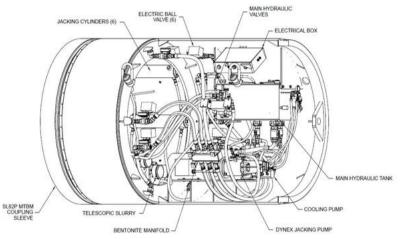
General Arrangement of Akkerman Lube and Jacking Can.
